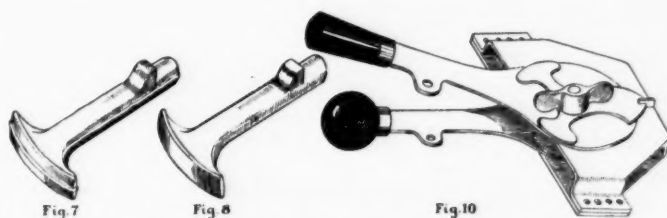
Rough duralumin forging. Fig. 8—Finished forging for Cadillac hood catch. Fig. 10—Airplane throttle control in which the bolt and wing nut are duralumin forgings and the spring and other parts are made from sheet rolled from the same alloy
